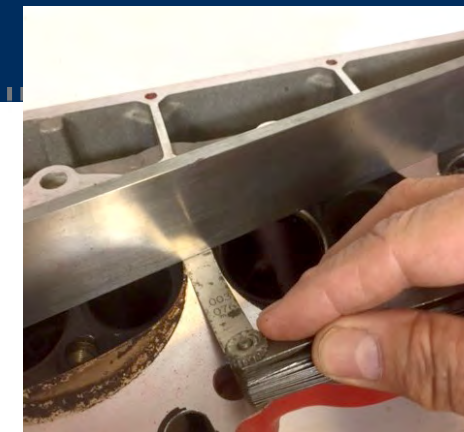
Using a machinist's precision straight edge you should not be able to slide a feeler gage larger than .003" between the straight edge and the cylinder head deck surface. A carpenter's square does not qualify as a precision straightedge.
